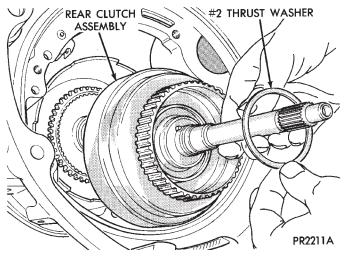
No. 2 Thrust Washer and Rear Clutch
